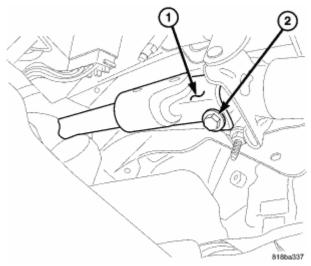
Identifying Lower Column Pinch Bolt & Steering Coupler Courtesy of CHRYSLER LLC
